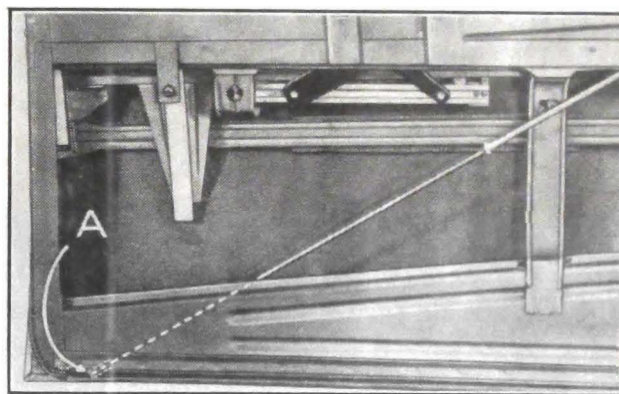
Showing location of door frame stiffener rod on convertible coupe door.
